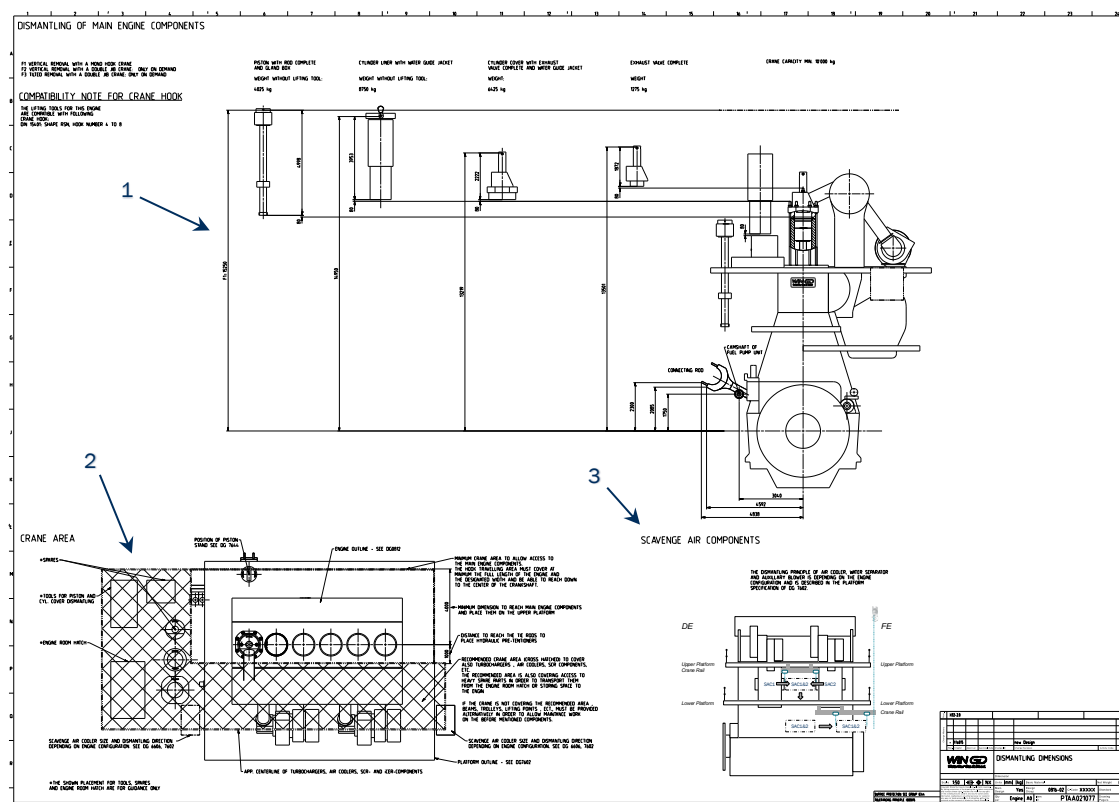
Example drawing of new Dismantling Dimensions (DG 0816-02) for X82-2.0 engines
